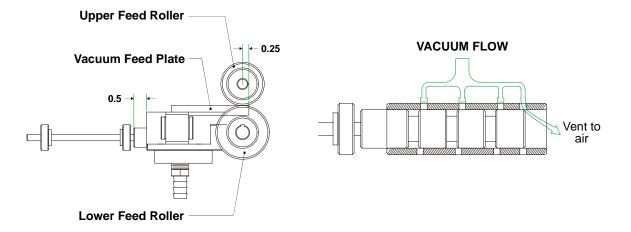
Feeder vacuum valve assembly illustrating the location of the spool assembly when the shuttle feed plate is 1/4" past the center of the feed rollers. Side view shows vacuum flow from the top to the exhaust port when vacuum is released. End port shown is the vent port which is fully open.
